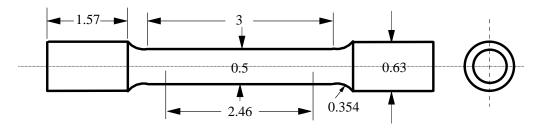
Cylindrical specimen geometry used for tensile testing. The units are in inches (not to scale). The diameter at the gauge length is 0.5" (12.5 mm), the gauge length is 2.46" (62.5 mm), the length of the reduced section is 3" (75 mm) and the radius of fillet is 0.354" (9 mm).
